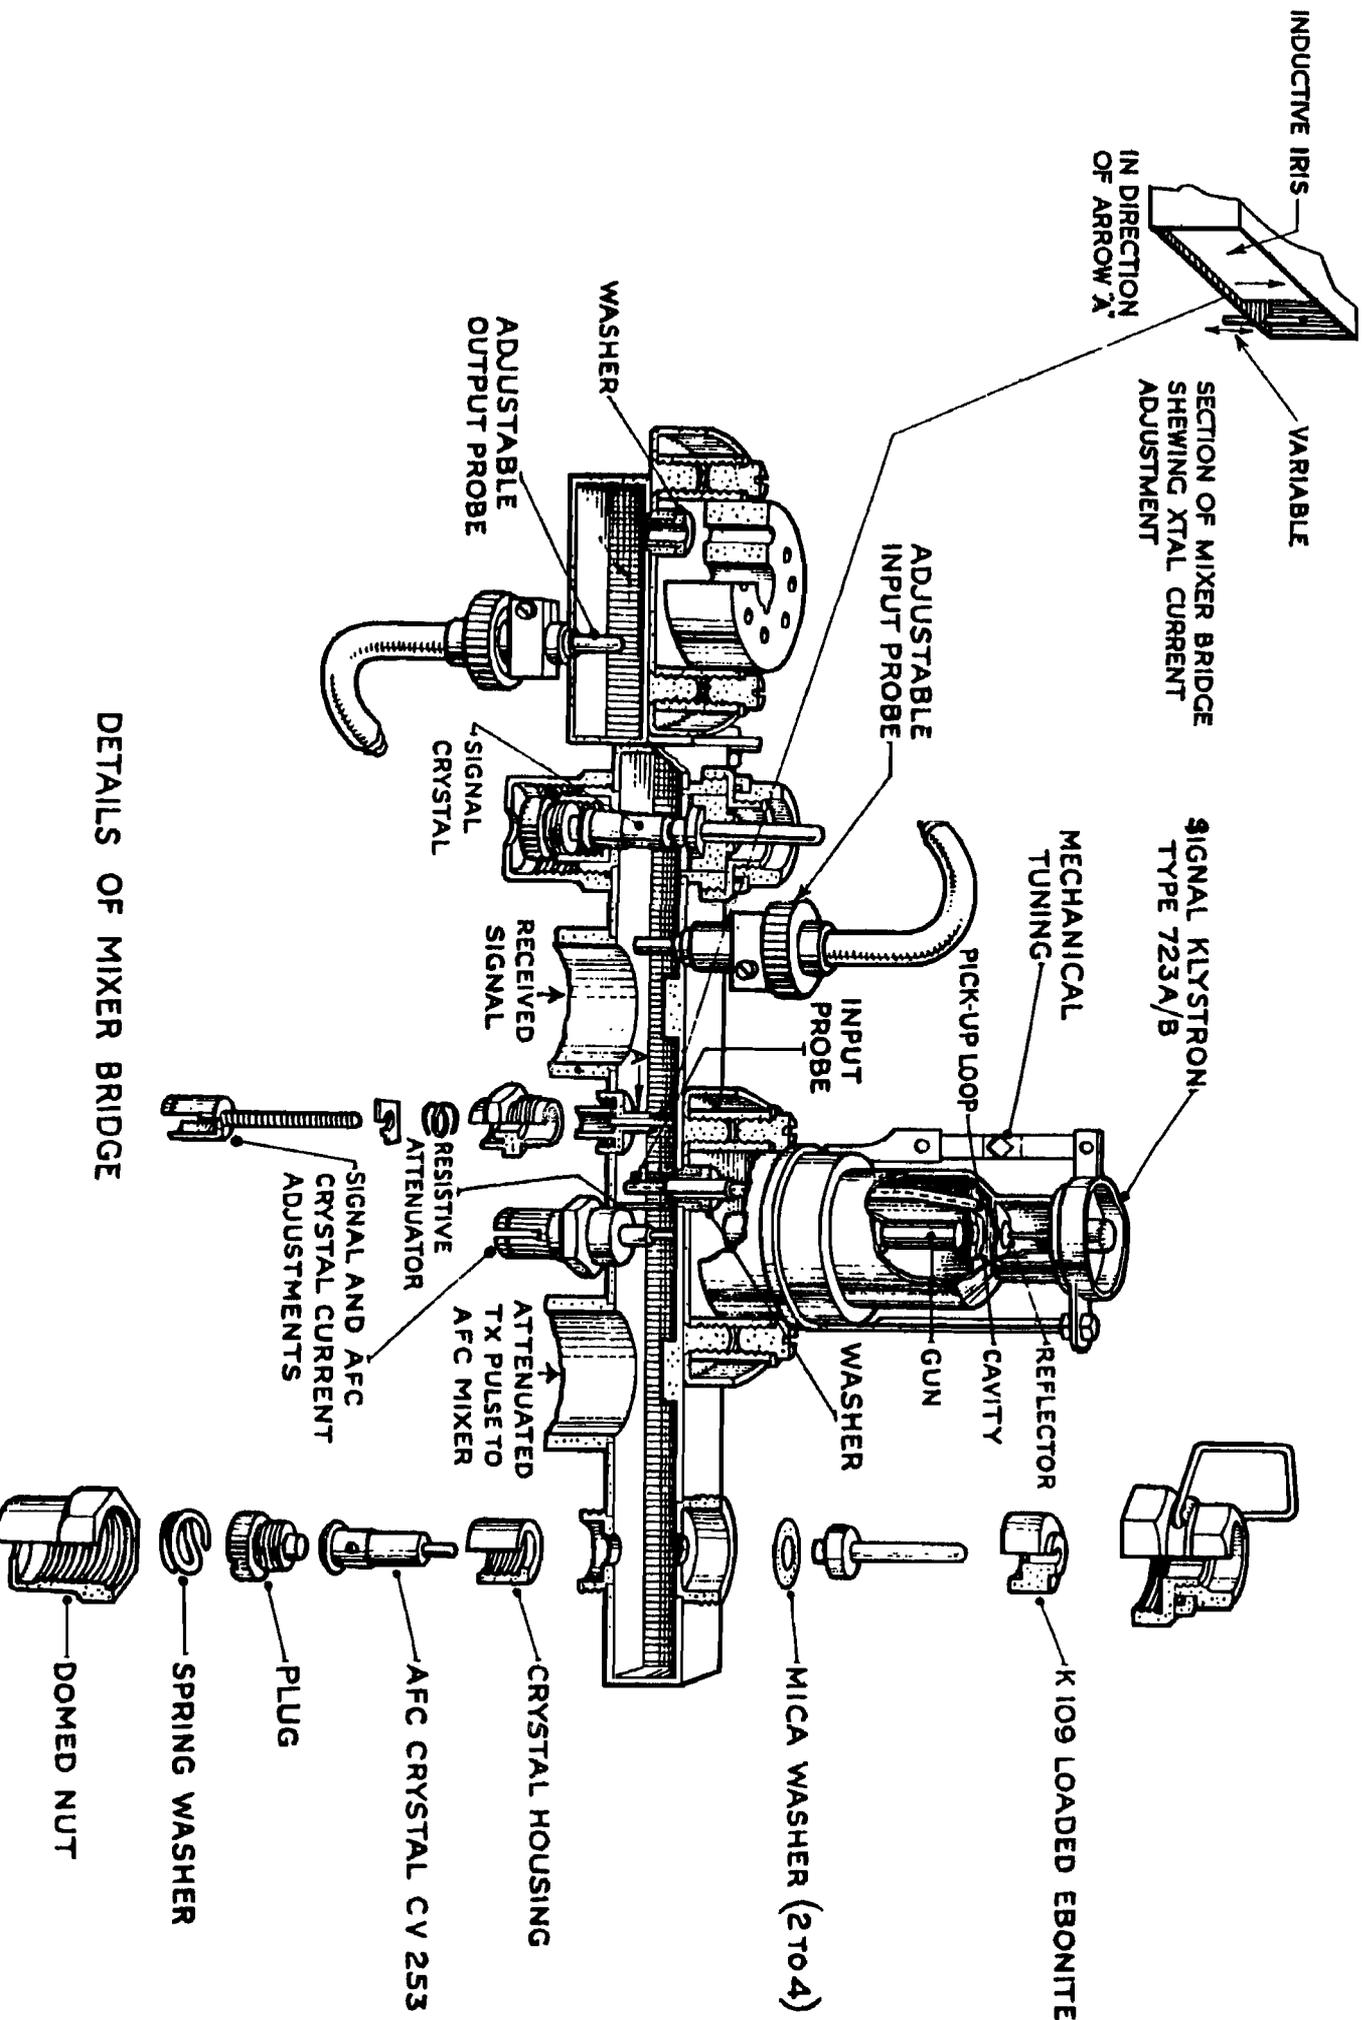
T.R. 3523 E, WAVE GUIDE ASSEMBLY
